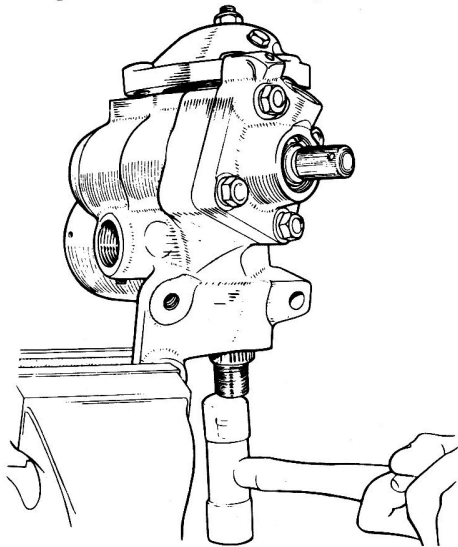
Removing the sector shaft worm follower assembly and the top cover
